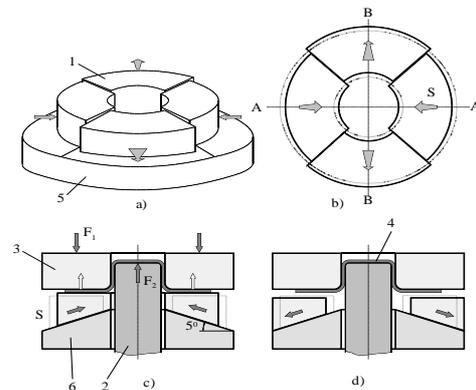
Die with segmented blank-holder, cylindrical parts application [13]
